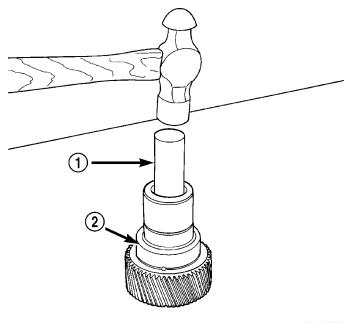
Install Front Output Shaft Front Bearing 1 - FRONT CASE HALF 2 - INSTALLER 8891
